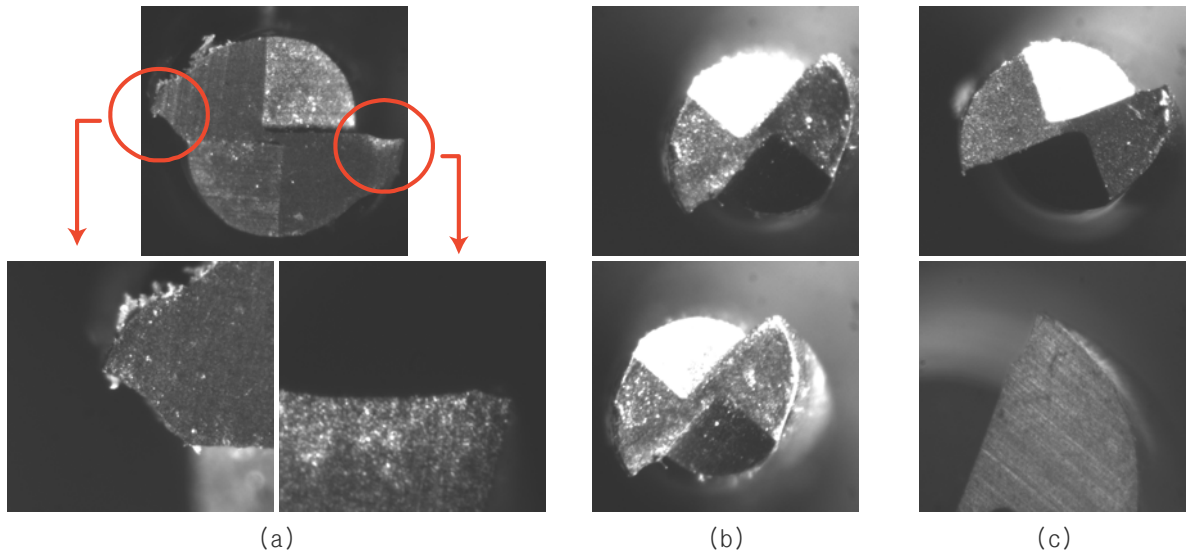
the wear of micro carbide tool after machining Al7075; (a) broken cutting edge of tool of Dia. 2mm, (b) flank wear of tools of Dia. 0.5mm, (c) new tool of Dia. 0.5mm (upper), new tool of Dia. 1 mm (lower)
